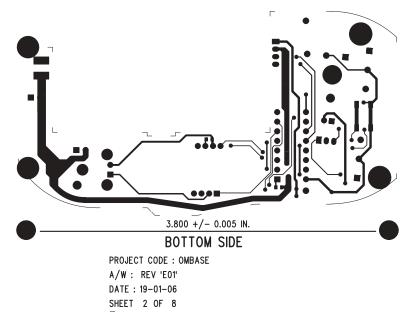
Bottom Side PCB Layout (Mouse Main Board)
